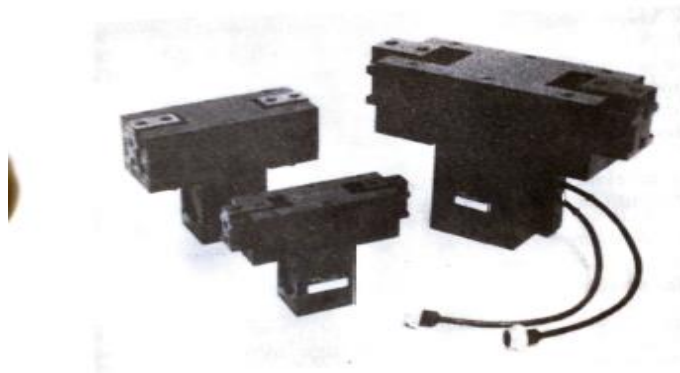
Mechanical gripper finger with linear movement using guide rails (Photo courtesy of Phd, Inc.)
